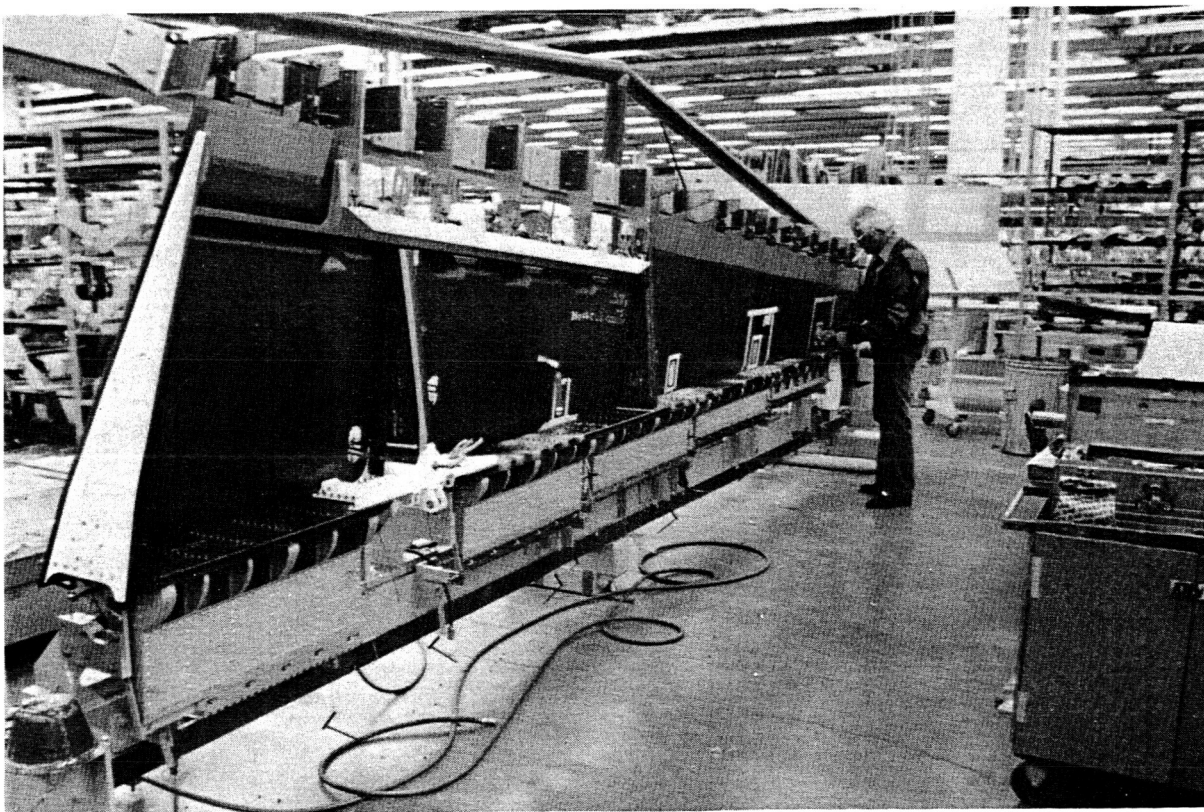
Lower Skin Panel in Place with Internal Structure of Elevator—Major Jig Position
